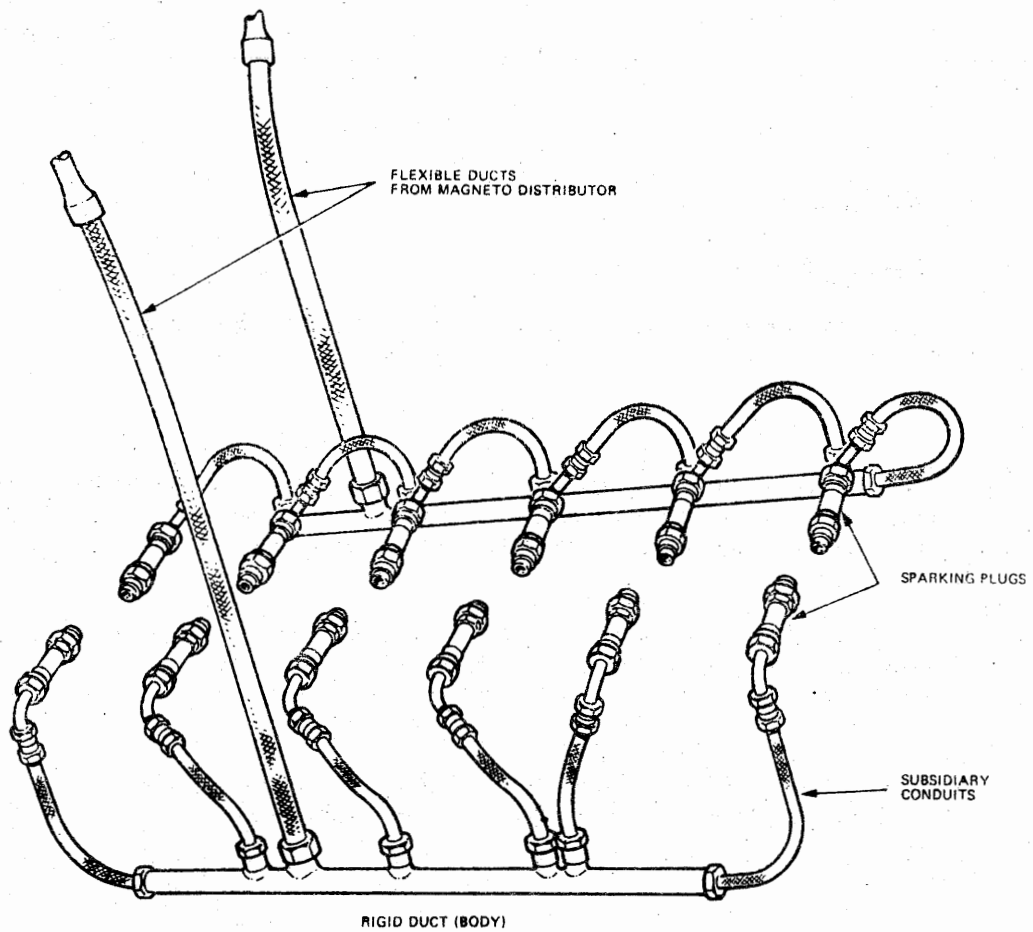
IGNITION HARNESS FOR A TYPICAL SIX CYLINDER, IN-LINE ENGINE
